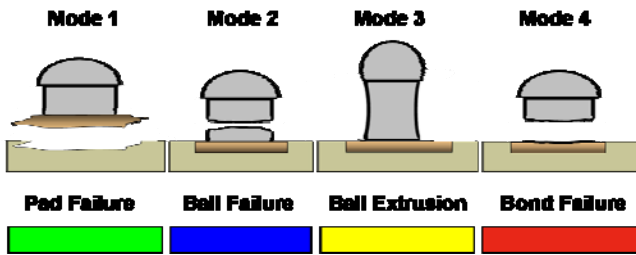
Illustration of cold ball pull failure modes and their location within the solder ball joint
